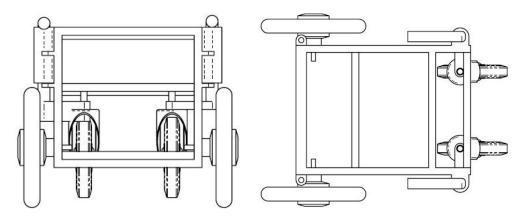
Mechanism for changing the overall dimensions in width due to the console fork of selfaligning (rear) wheels (minimum overall dimension)
